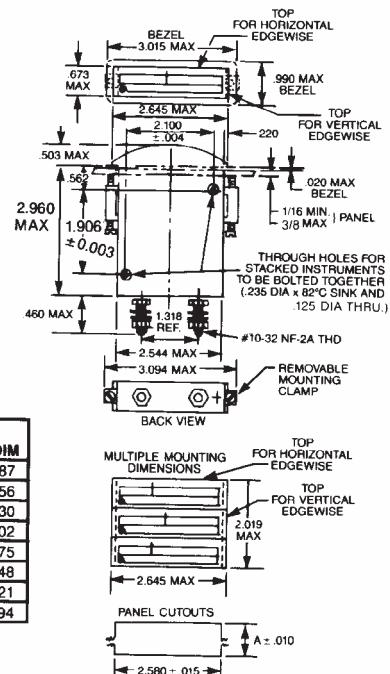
Outline Dimensions for 2½-inch Type 287 Meter
